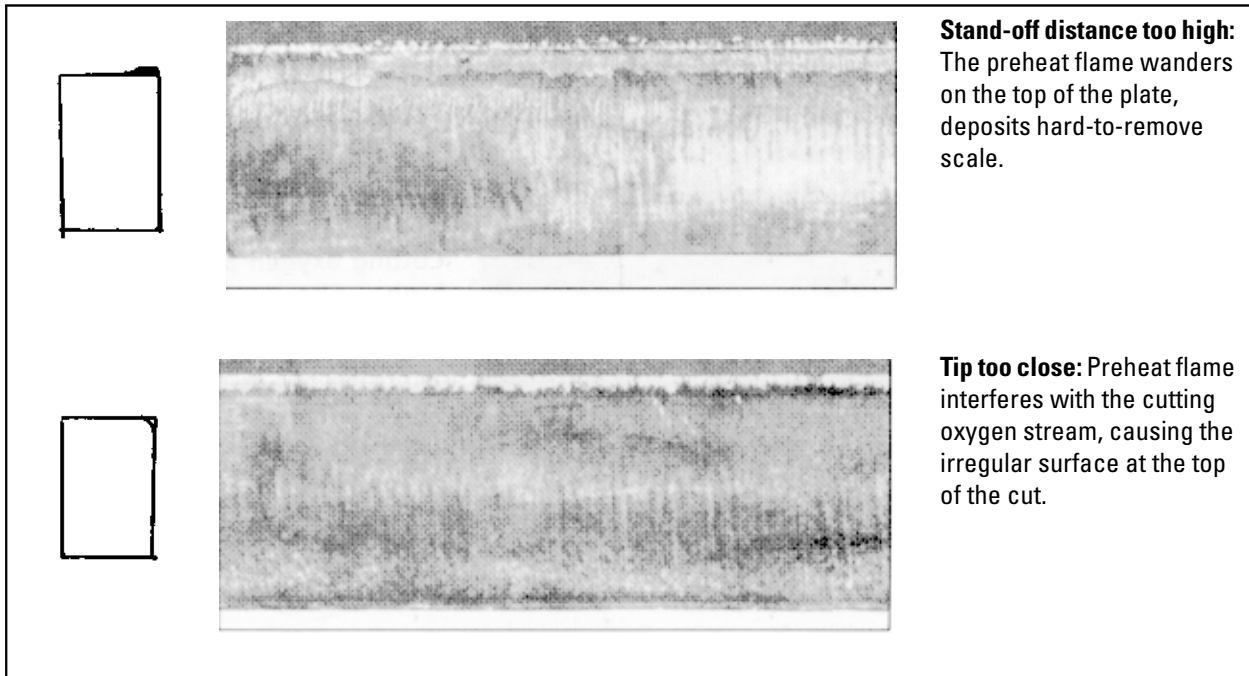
Troubleshooting Guide to Oxyfuel Gas Cutting (*Courtesy of the American Welding Society*) (2 of 3)
